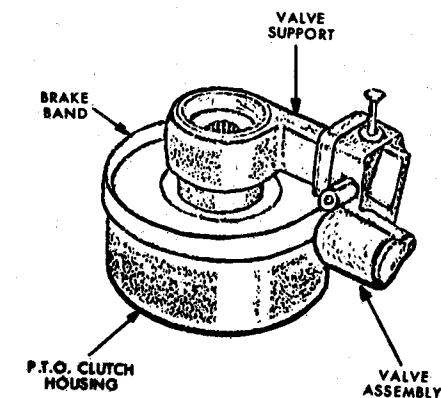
After removing clutch assembly, lift off valve assembly with valve support and brake band.
